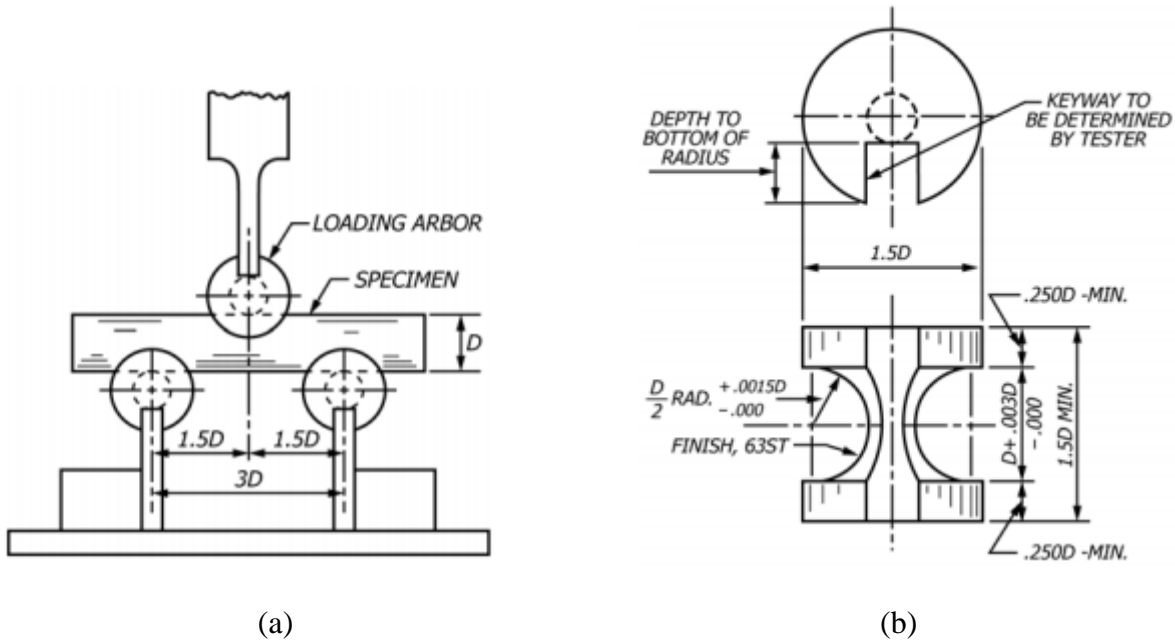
Test setup for ASTM D4475. (a) Span configuration for 3D span. (b) Anvil dimensions
